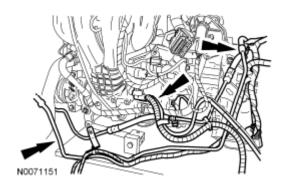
Locating Power Steering Tubes And Wiring Harness Courtesy of FORD MOTOR CO.
